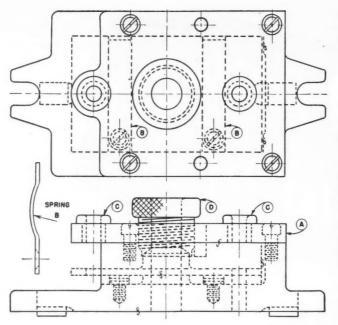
Drawing of a Jig Which Can Be Used in Machining Uneven or Distorted Steel Stampings
